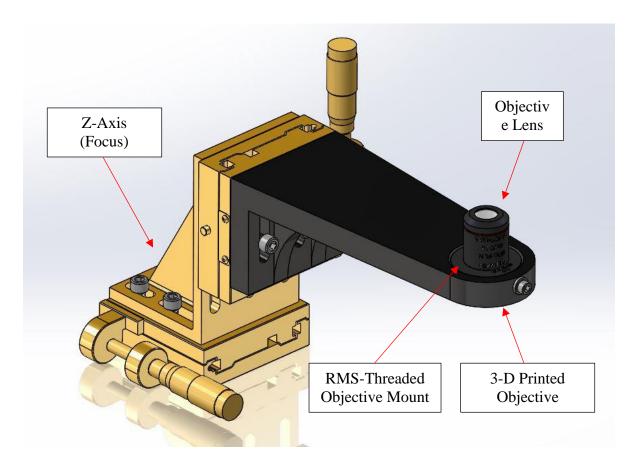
This figure displays the mounting of the objective to a 3-D printed bracket and fixtured to two linear translation stages for precision adjustment below the sample and focus.
